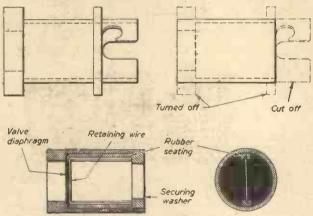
Details of a simple and effective no-return valve for the air exhaust tube.
